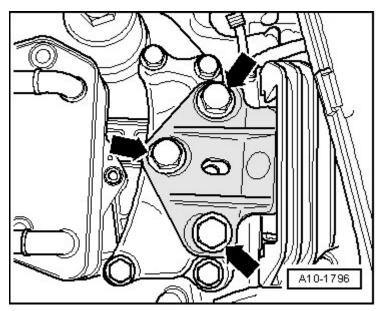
Identifying Engine Mount To Engine Mount Bracket Bolts Courtesy of AUDI OF AMERICA, LLC
